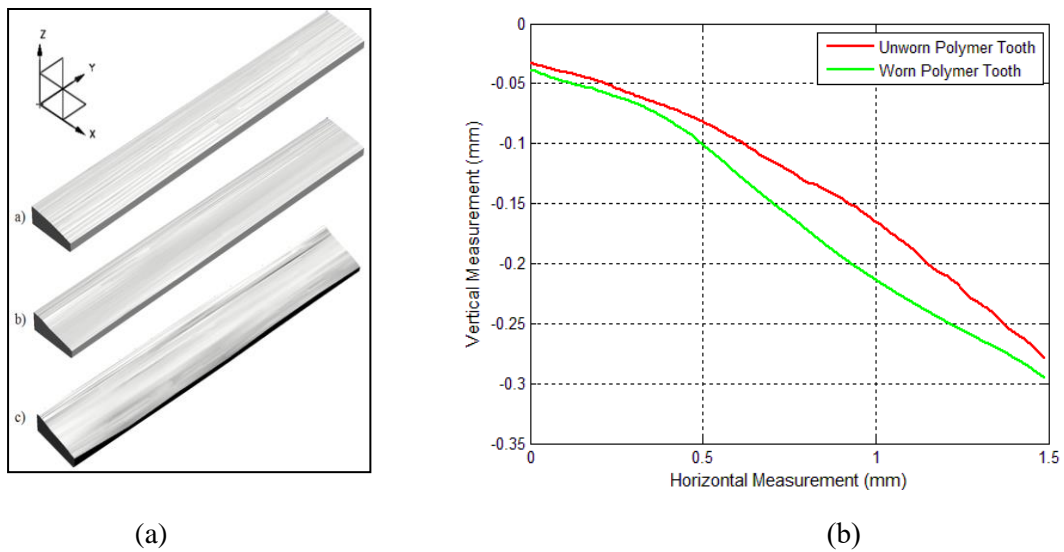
Measured gear teeth. (a) scanned gear teeth and (b) tooth profile measurement
